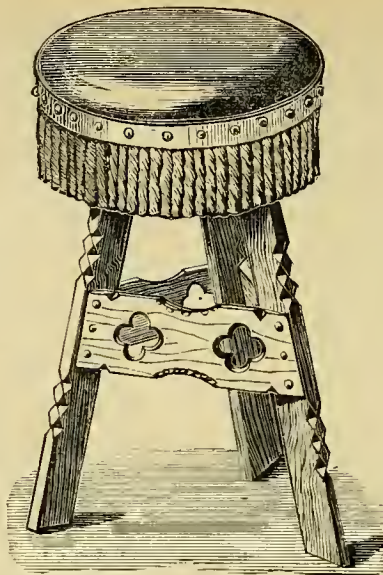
STOOL FOR HALL—PERSPECTIVE VIEW.
